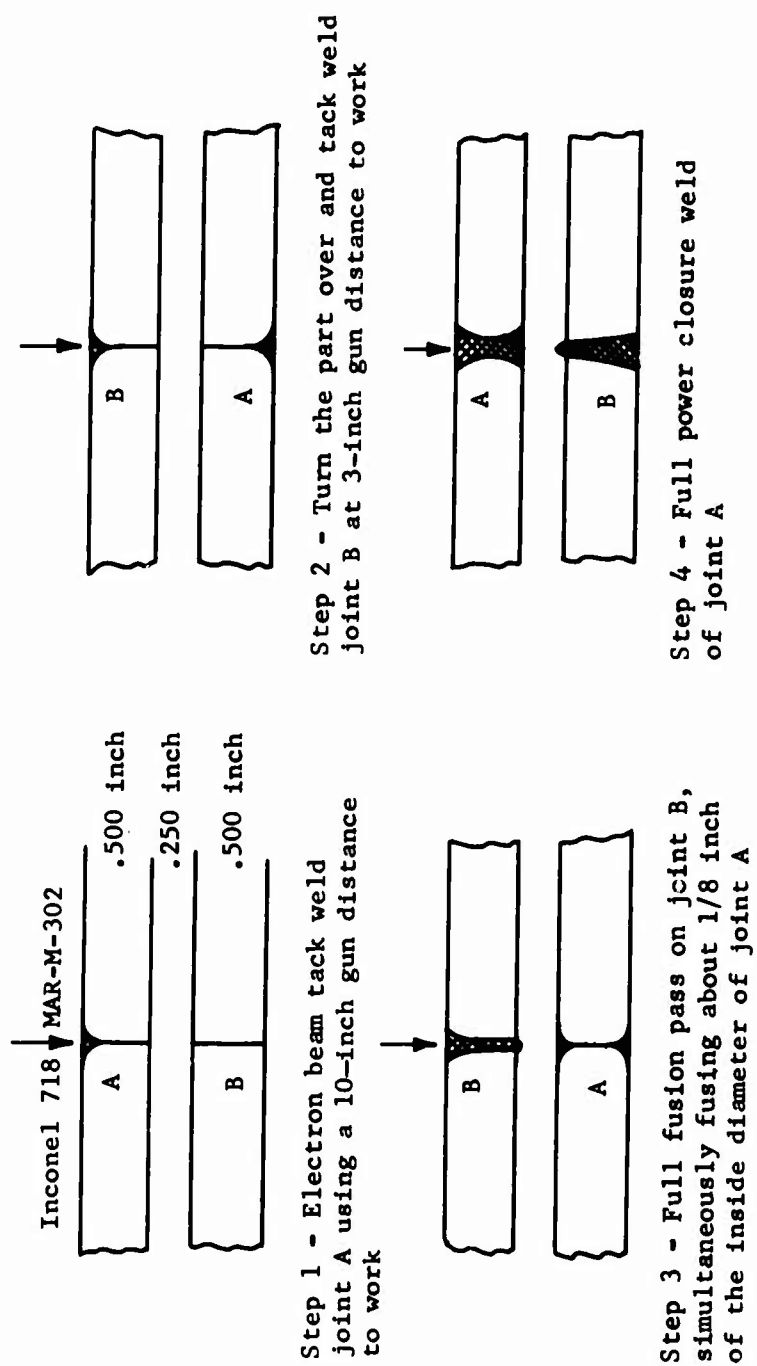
Blade-to-Disc Welding Process Sequence.
